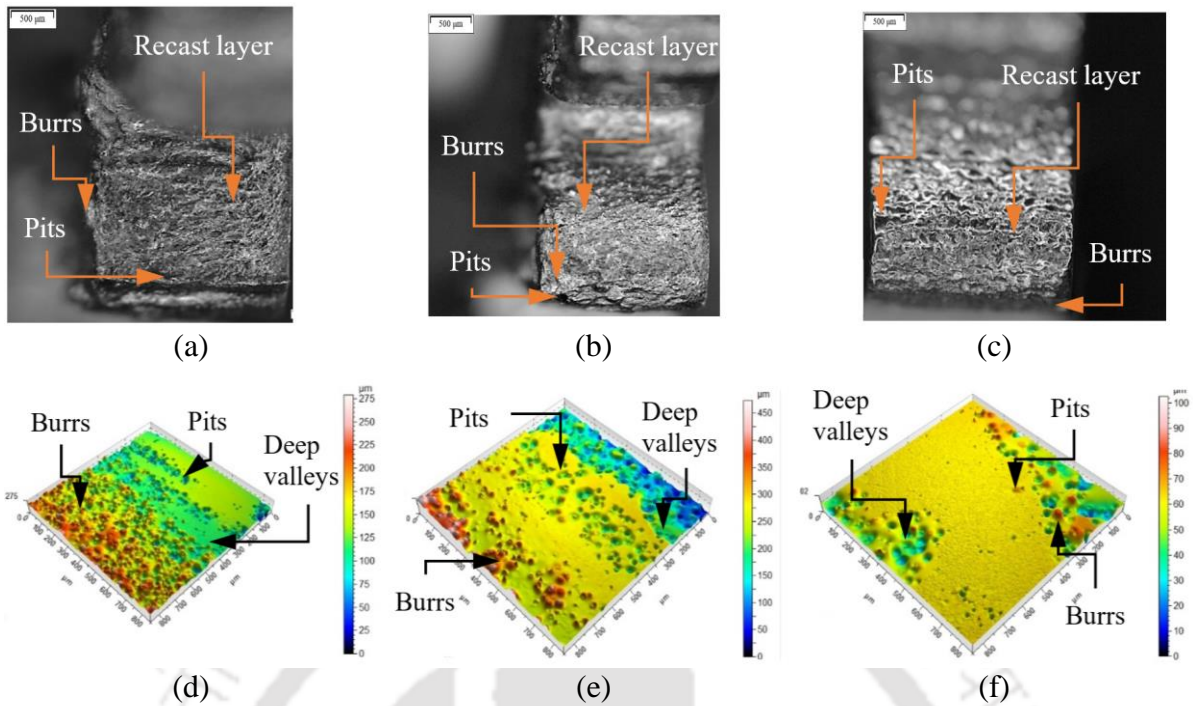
Macrographs of gear teeth involute profile (a) before finishing; After finishing (b) without and (c) with using uniform flow restrictor; Surface topography of involute profile (d) before finishing; After finishing (e) without and (f) with uniform flow restrictor by Type-I MRPF
